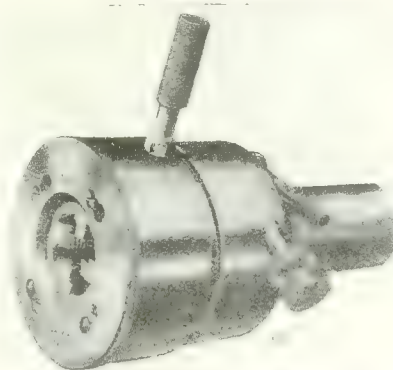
GENERAL VIEW OF THE DIEHEAD
